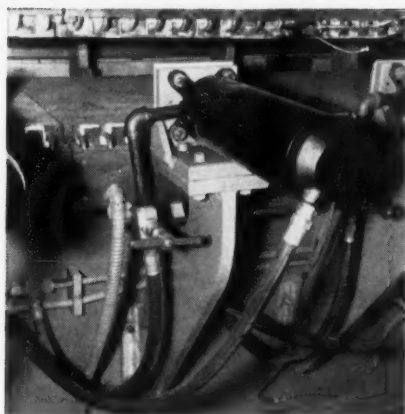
Close-up showing how each pressure cylinder is mounted on the press brake.
